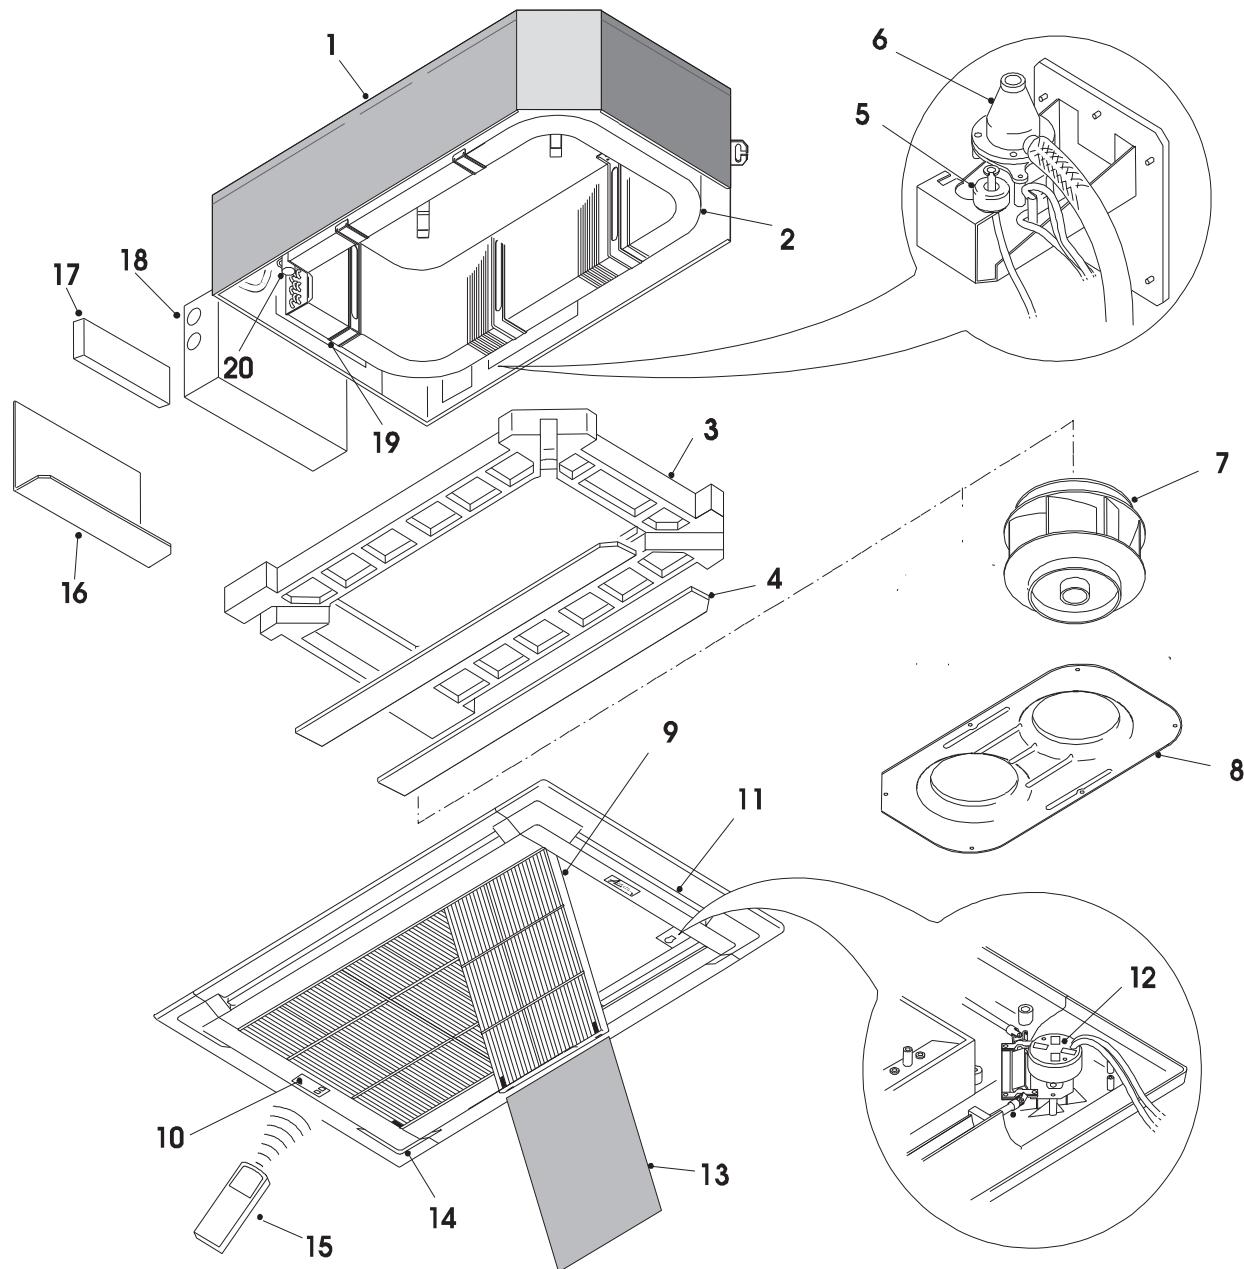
Exploded Unit Drawing & Parts List – Chilled Water – Sizes 08 and 12
